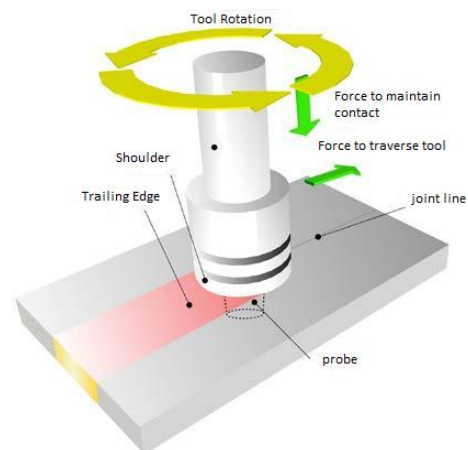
Schematic of the Friction Stir Welding Process [2]
